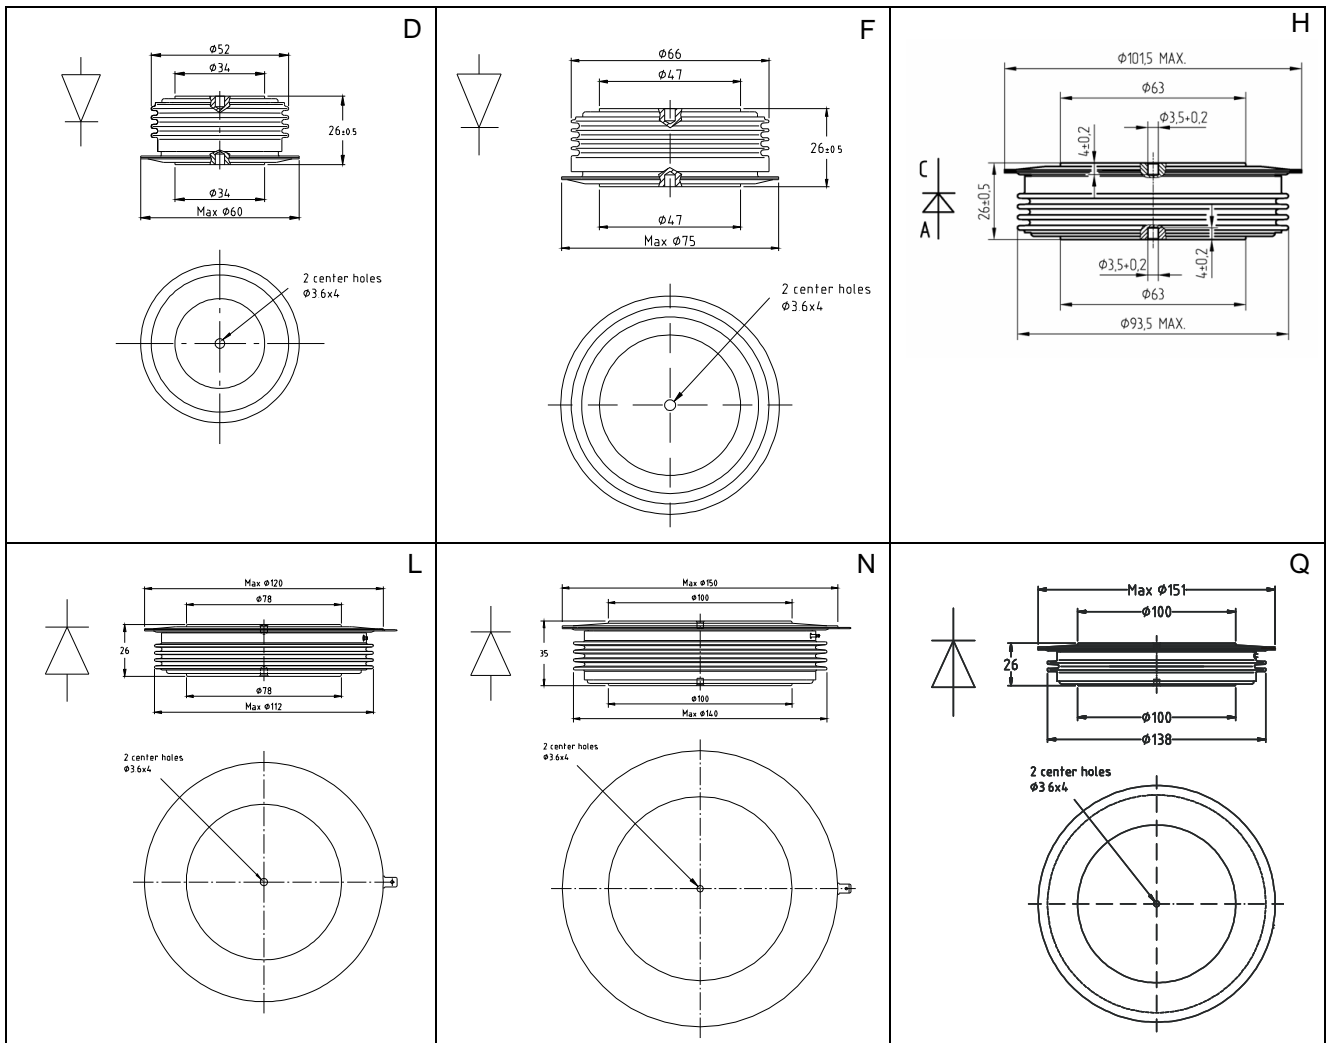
Diode housing outline drawings. All dimensions are in millimeters.
